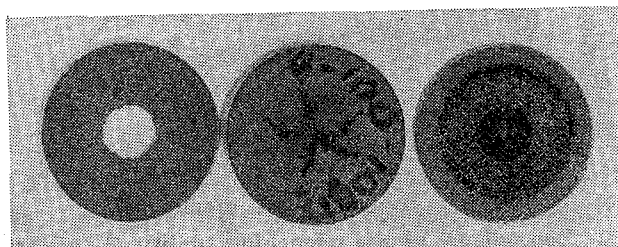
Sintered metals fractured by explosions in the long ($D=1, L=120$) explosion chamber
